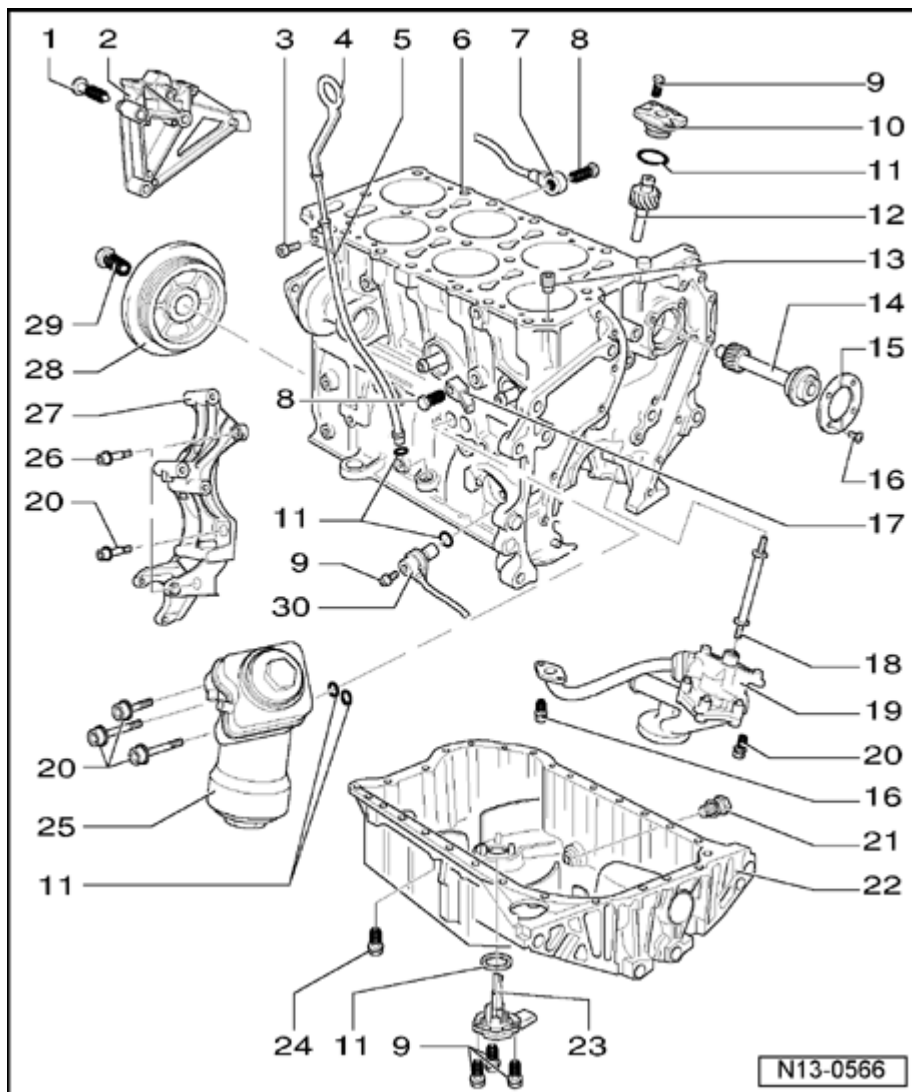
Identifying Crank Drive, Assembly Overview - Part II
